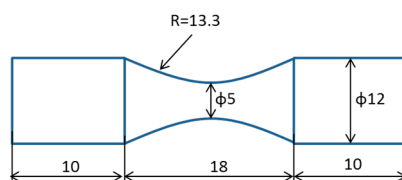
Shape of torsional fatigue test specimen, dimensions in mm.
